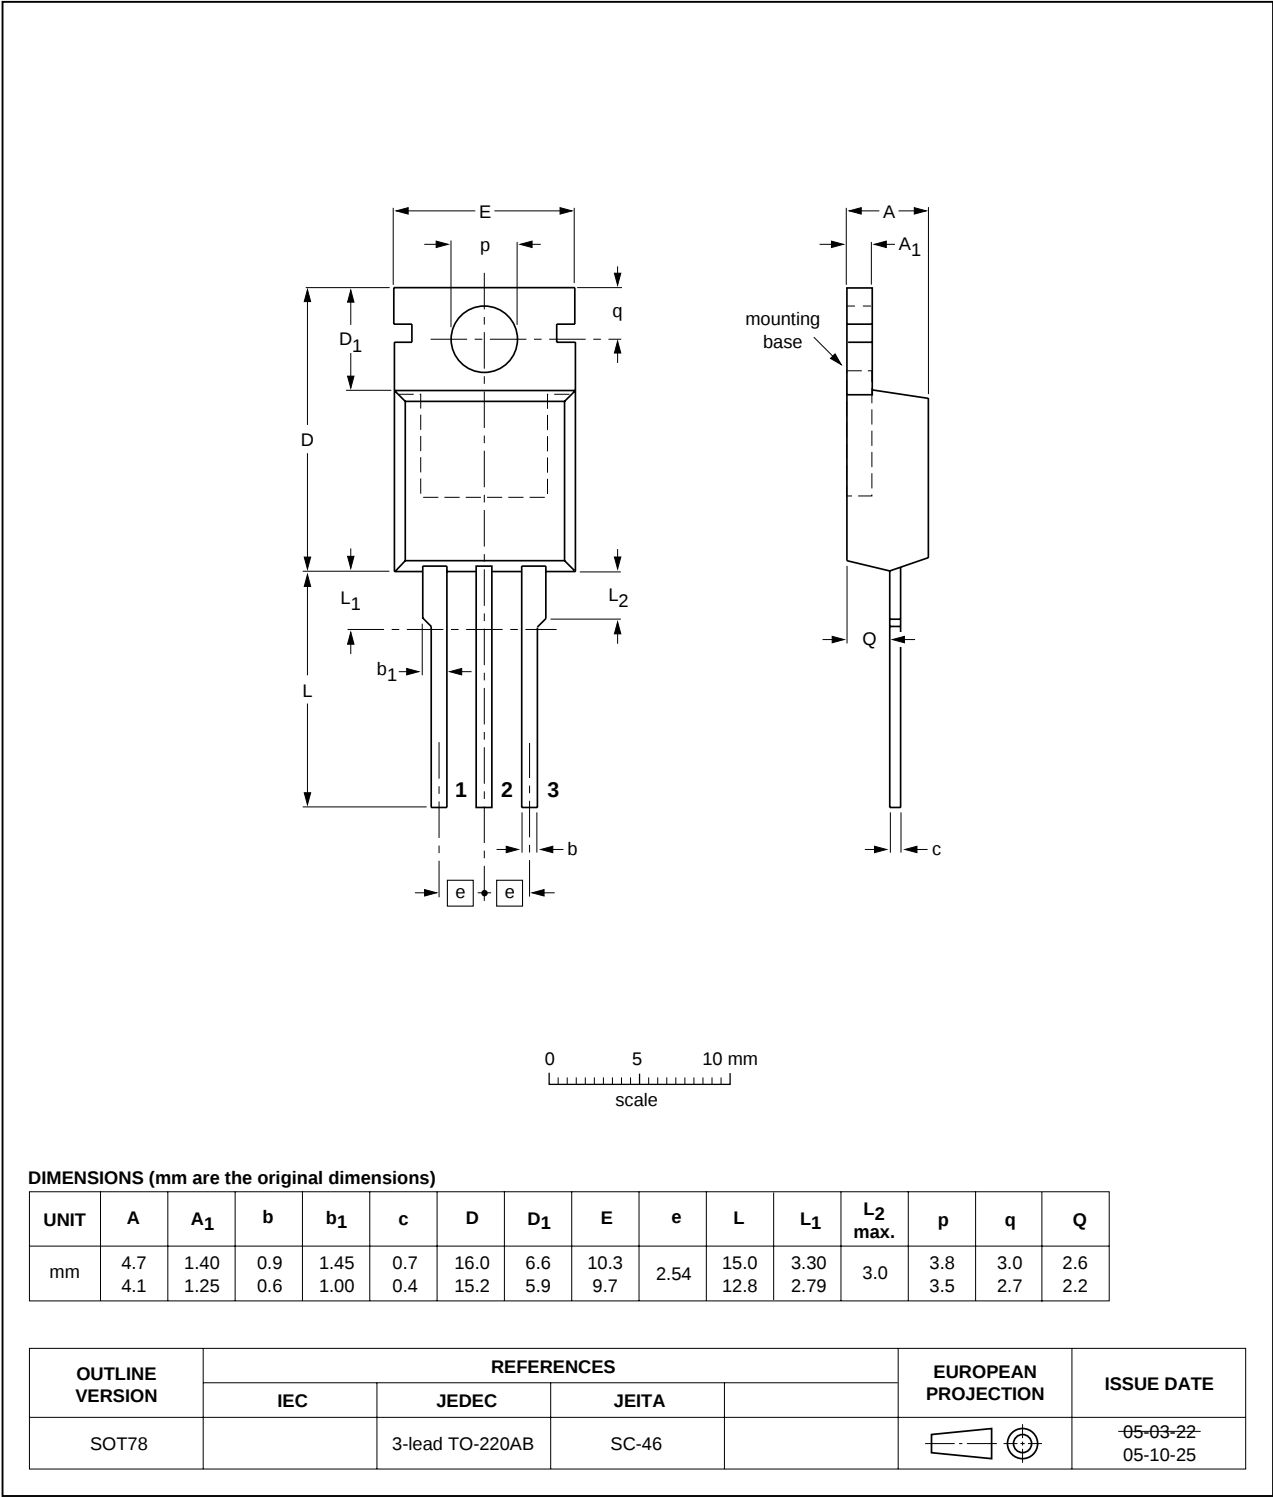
Package outline SOT78 (3-lead TO-220AB)
